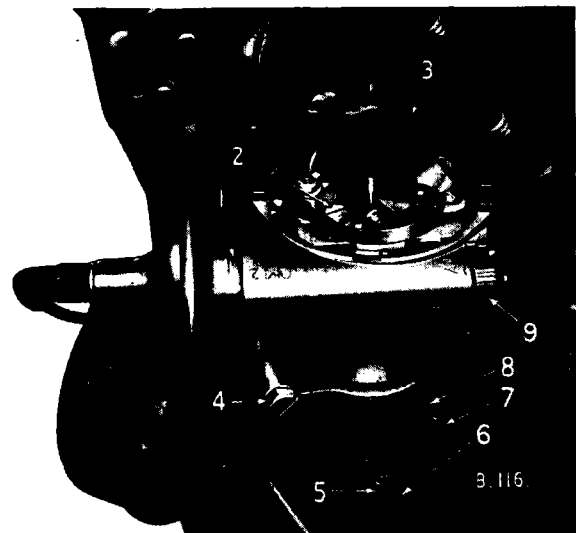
Distributor rotor arm position at T.D.C. No. 1 compression (Herald 1200, 12/50)
